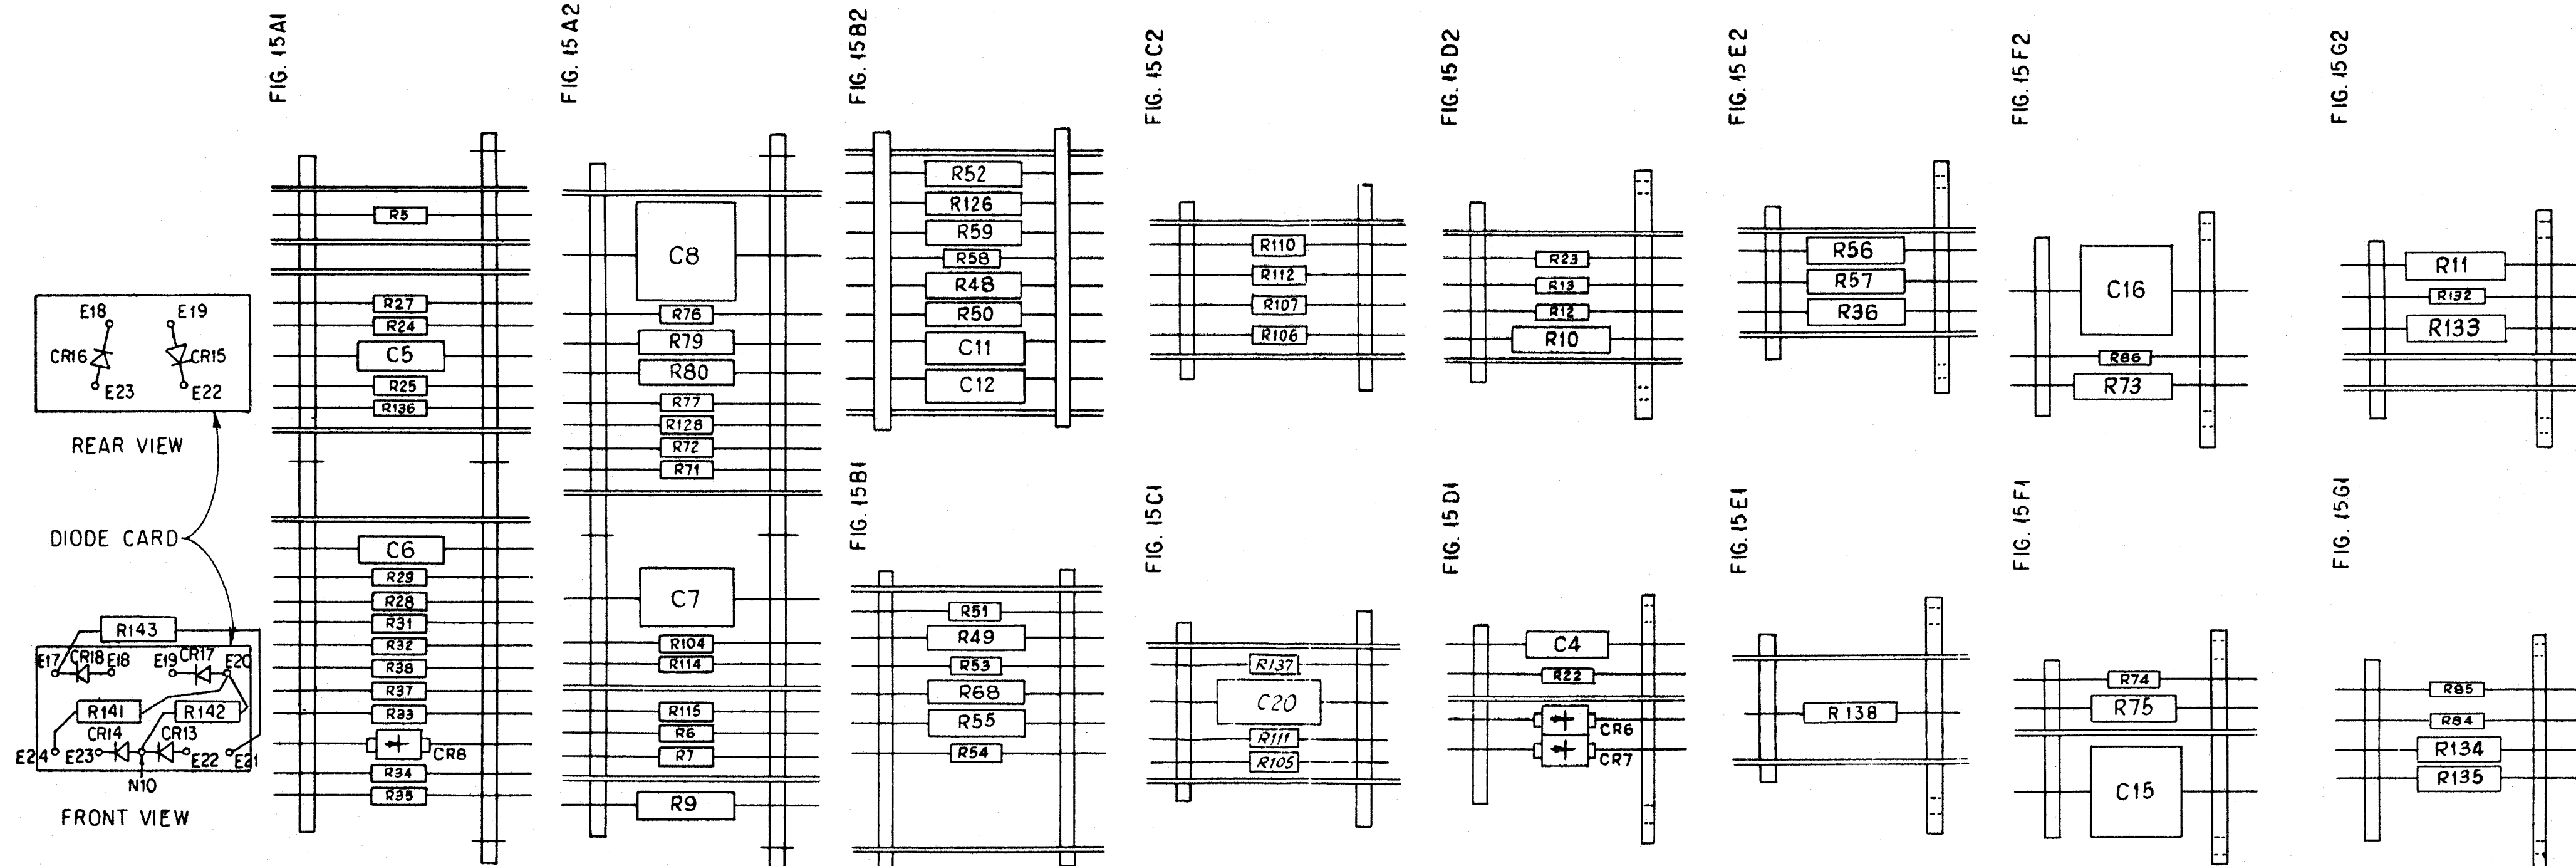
Location of Components on Equipment Ladders and Diode Card
